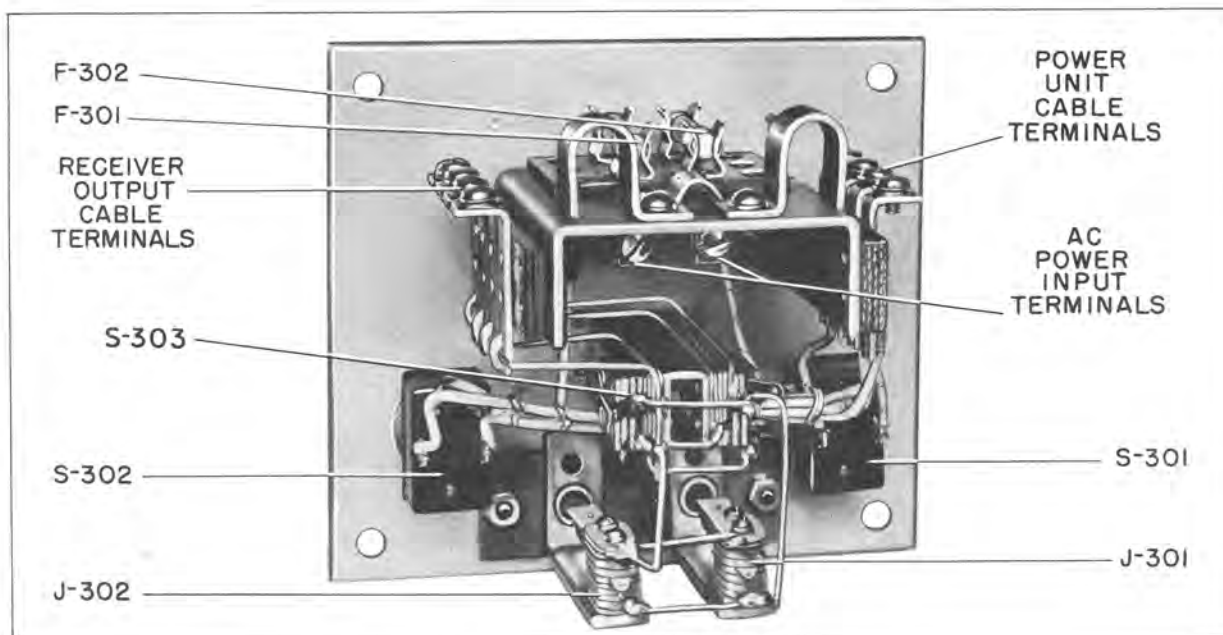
Control Unit CMX-23073-A (Rear View of Panel)
